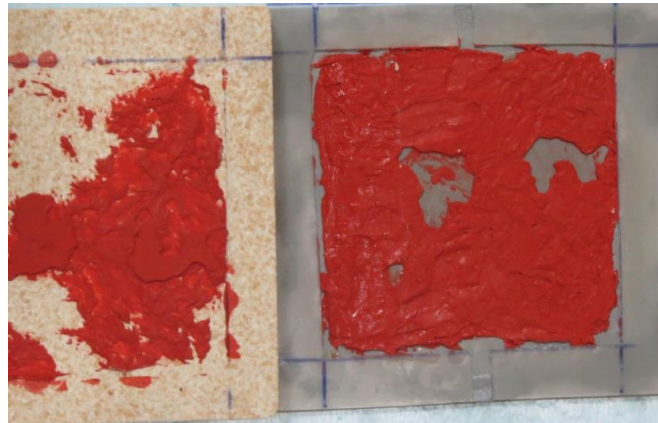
Fracture surface of a specimen containing only silicone
